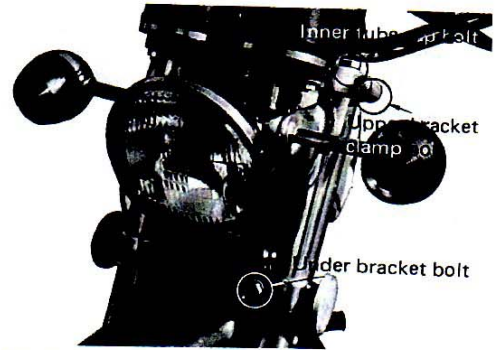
Upper bracket clamp bolt, inner tube cap bolt and under bracket bolt
